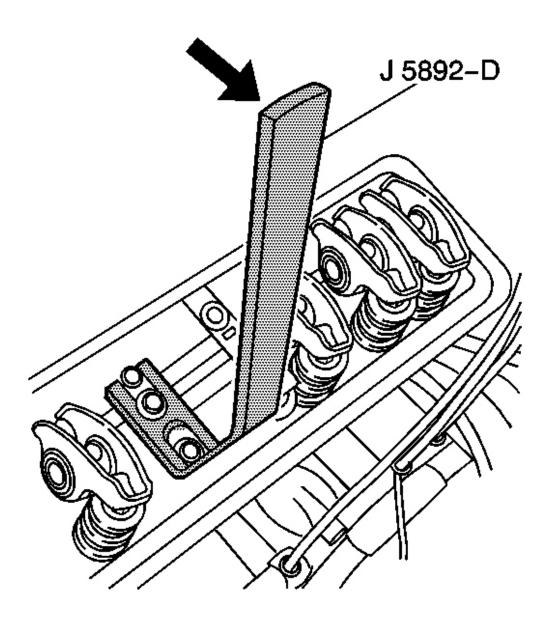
Installing J 5892-D Under Washer On Rocker Arm Bolt Courtesy of GENERAL MOTORS CORP.
